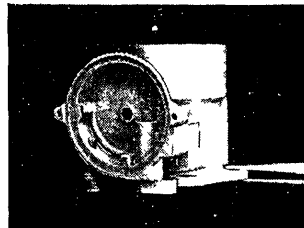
Remove all parts from air horn. Do not remove piston housing attached to air horn with rivet
